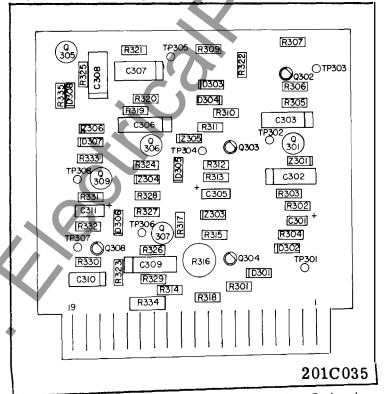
Component Location of the Output Board for the Type STU Relay.
